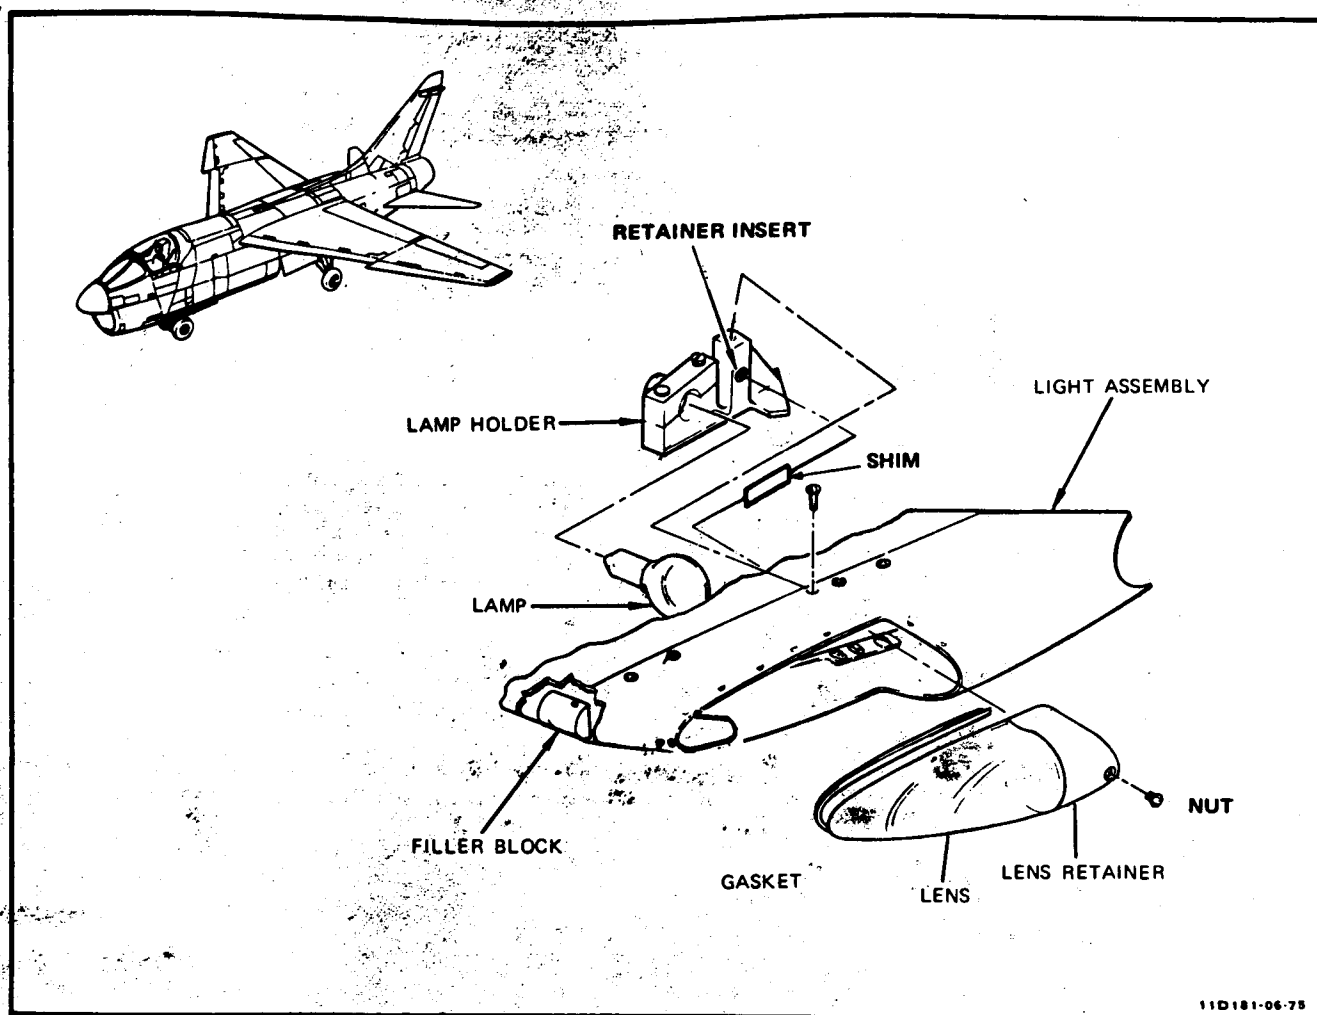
A. Wing Position Light Assembly, Lens, and Lamp Replacement
